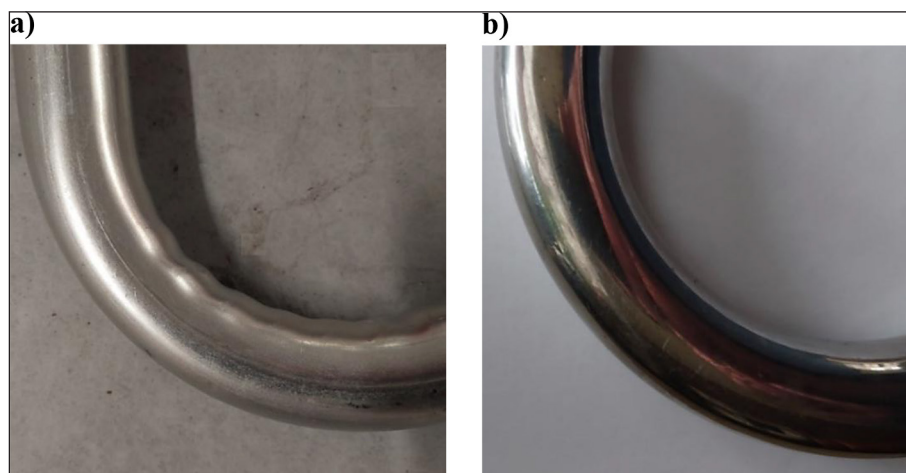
Image of the deformed longitudinal cross-section when bending a thin-walled pipe using the proposed mandrel shape, which was shifted significantly in front of the bending axis
